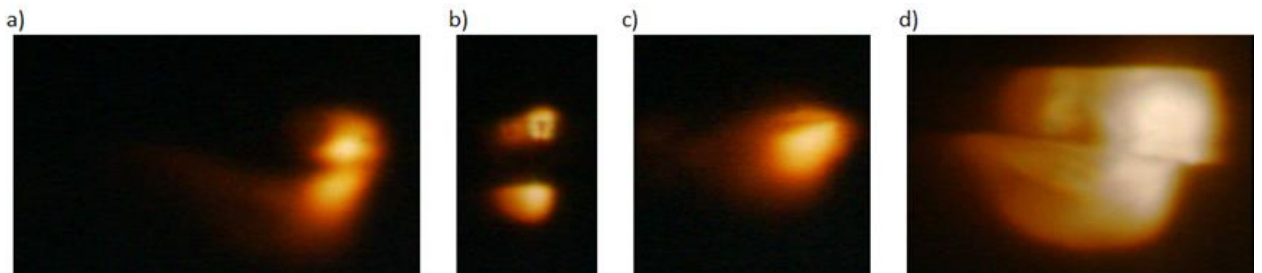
Different weld pool split locations. a) half-half split close to the edge, b) split by the gap, c) split close to the edge, most of the weld pool visible on the top surface of the workpiece, d) split between the gap, weld pool located between two edges and on the workpiece top surface.
